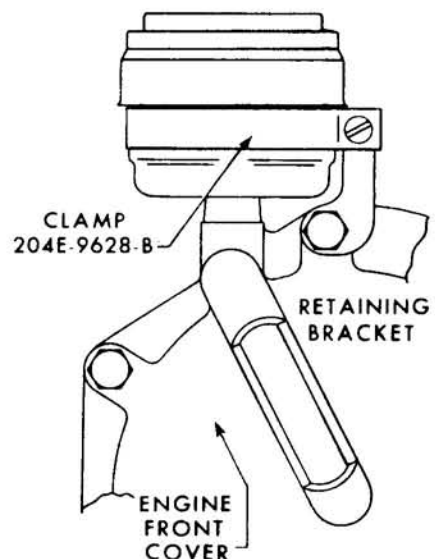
Early style breather assembly should be secured with clamp and bracket. Refer to Fig. 49 for dimensions for fabricating bracket.
